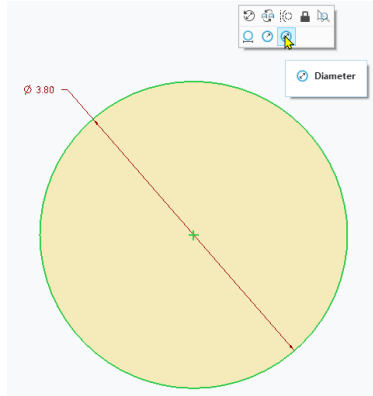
Dimensioning using the Diameter option of the mini toolbar
